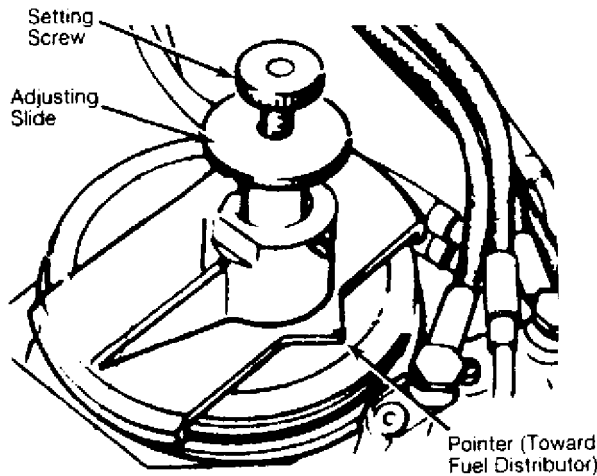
Sensor Plate Adjustable Holder (VW 1348/1)
